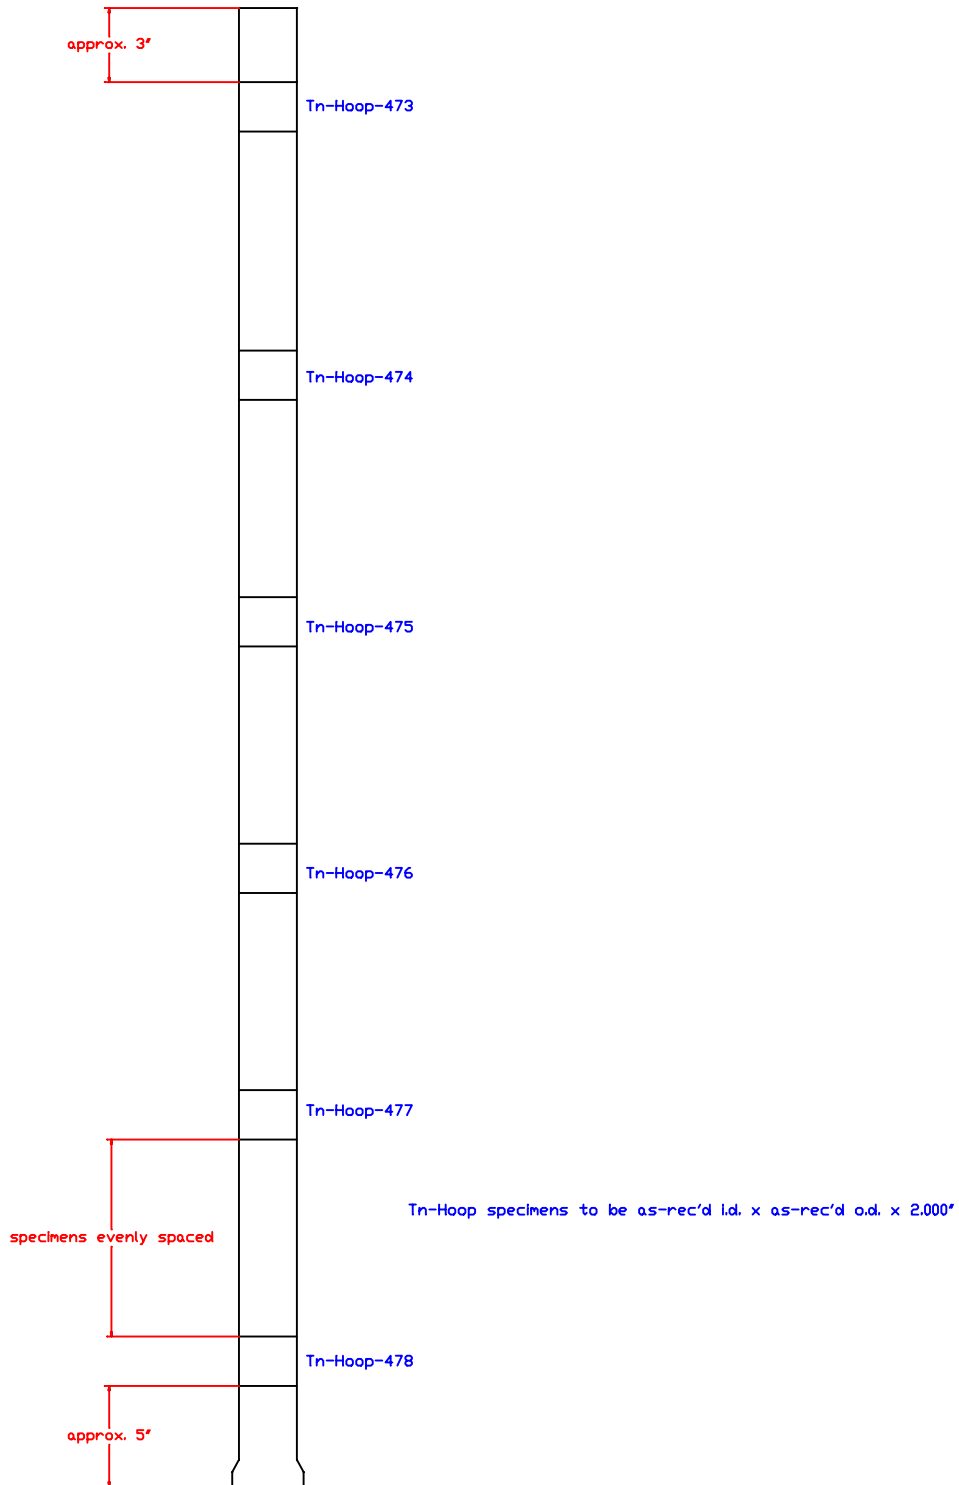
Cutting Plan for Pall 326 Element 1341-4
